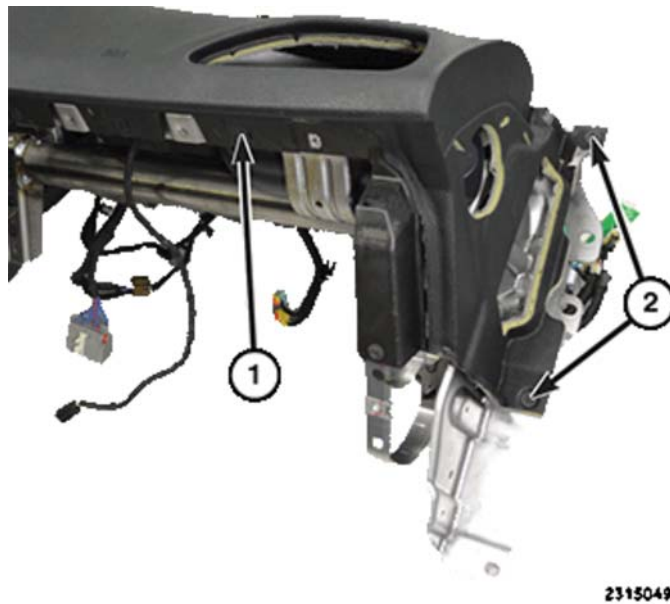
Right Side Of The Instrument Panel Screws & Glove Box Opening Screws
